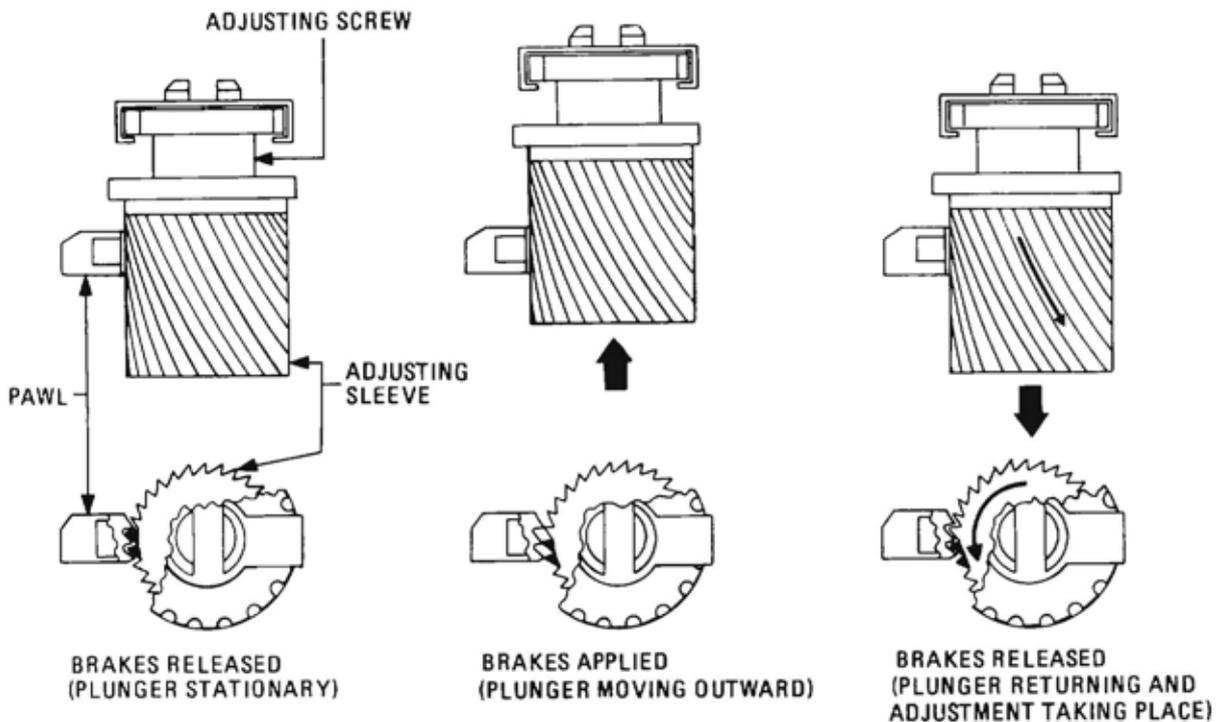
Adjusting Plunger Operation (Rear Brakes)
